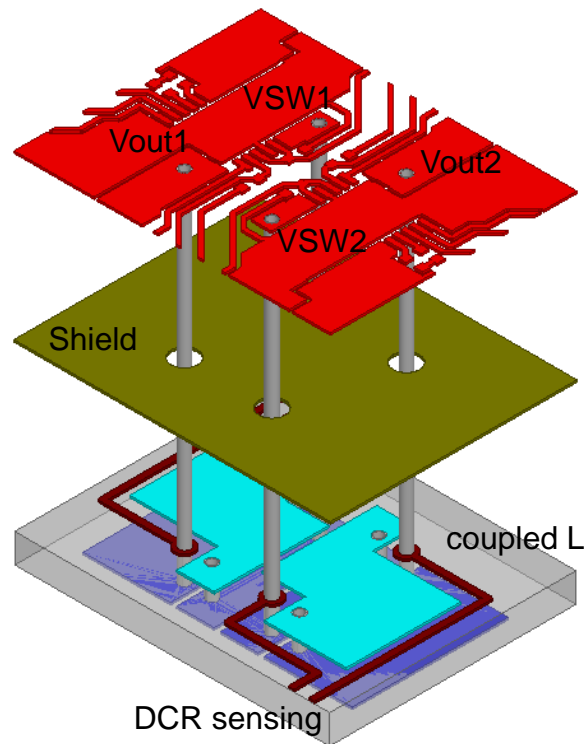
The expanded view of the 4-layer PCB structure for the two-phase 3D integrated POL module with embedded coupled inductor.
